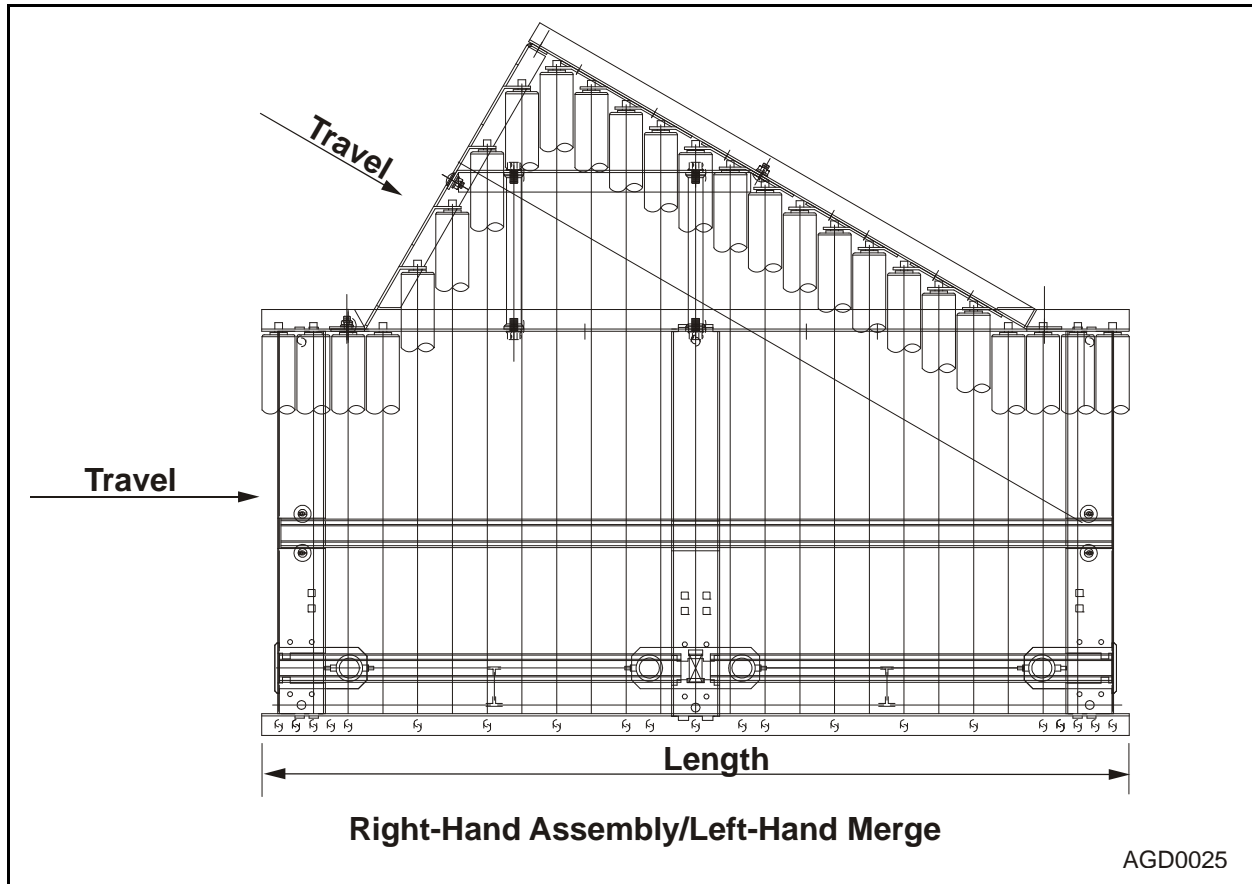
6 Accuglide Sawtooth Intermediate Merge Specifications
